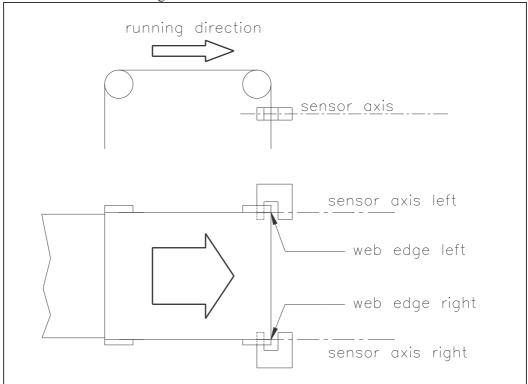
Position of the edge sensors referring to the web. They may be mounted to the left-hand or right-hand side.
